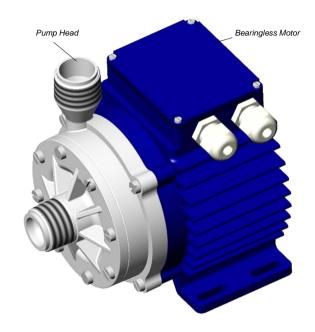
Bearingless motor with pump head LPP-600.13 (PVDF)
